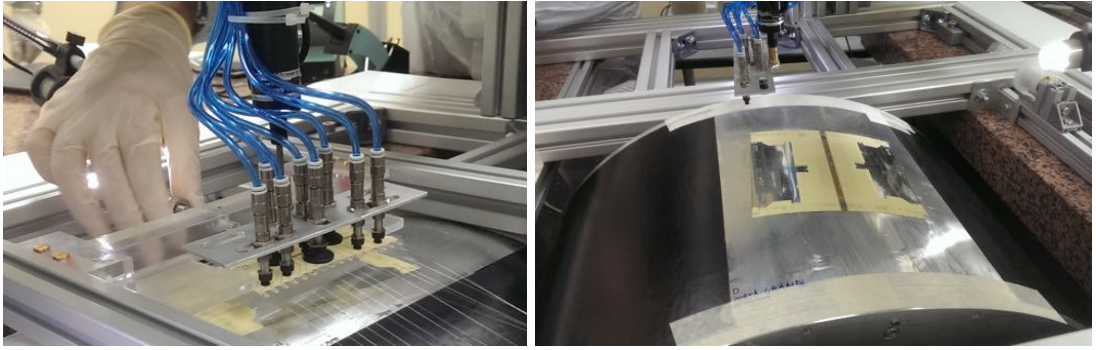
The extraction system based on vacuum suckers and the resulting empty big PCB connecting two wire-PCBs.
